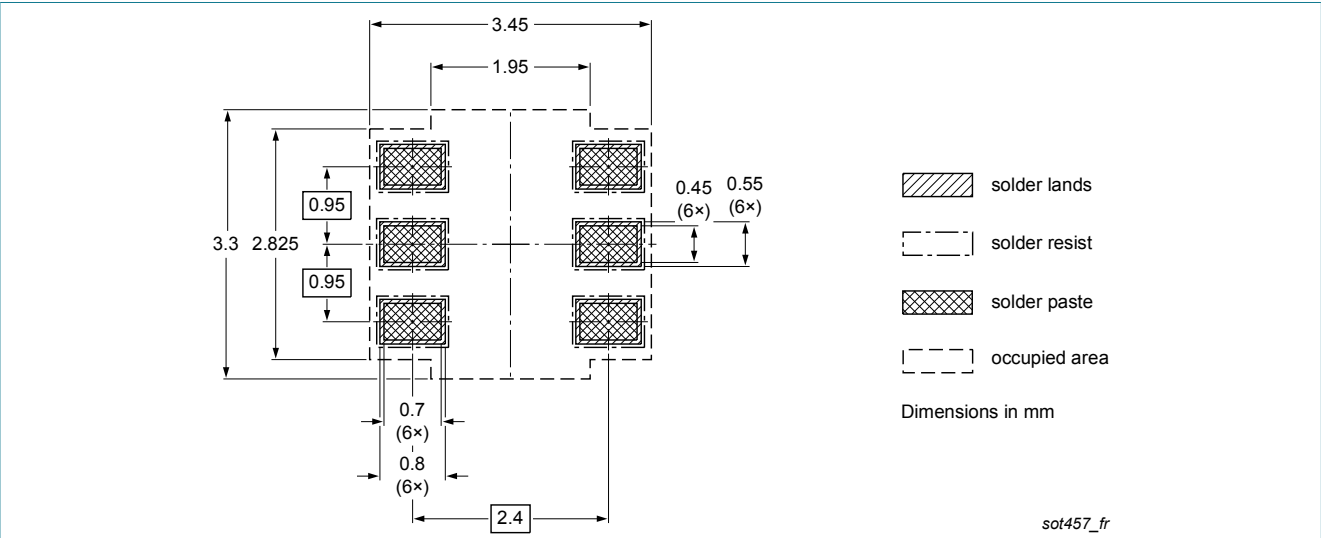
Reflow soldering footprint for SOT457 (TSOP6)
